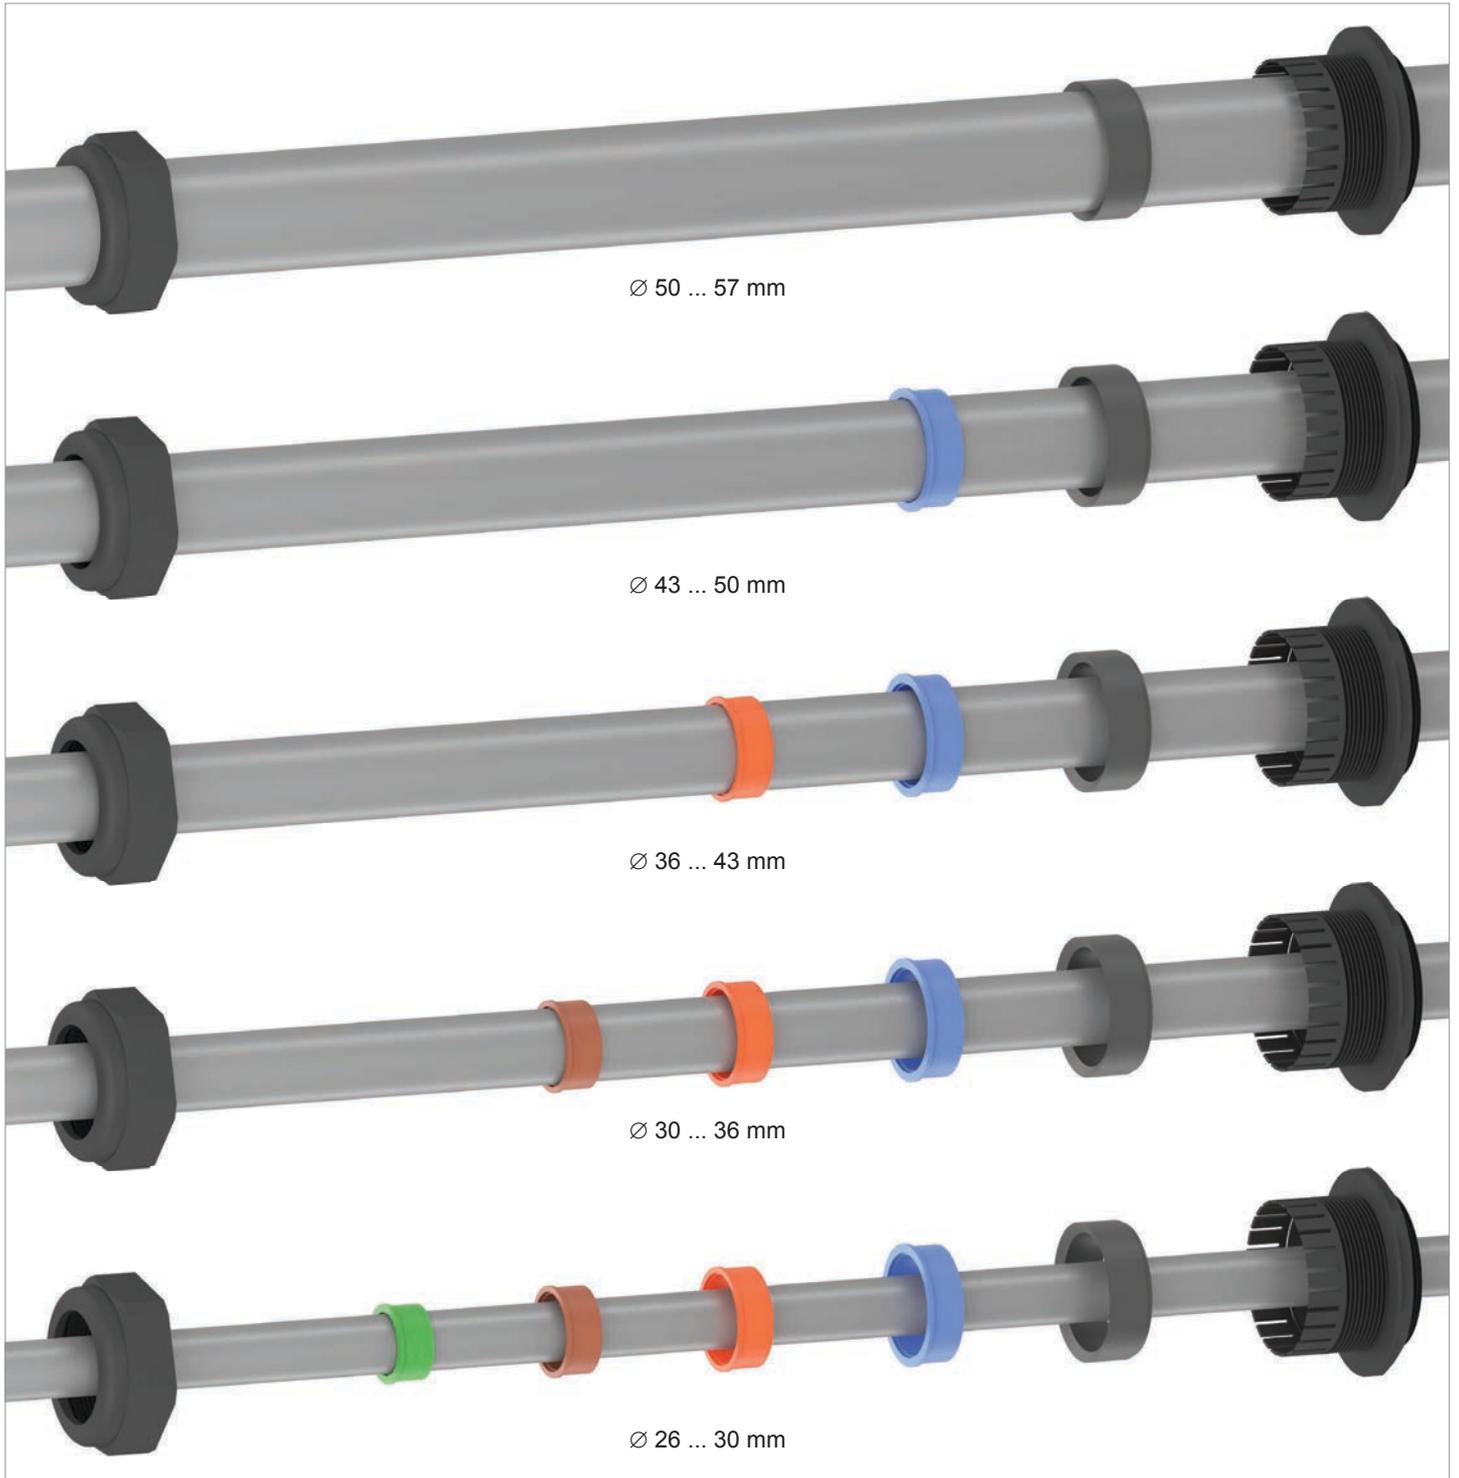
Use of the parts of the AC cable glands depending on the cable diameter
